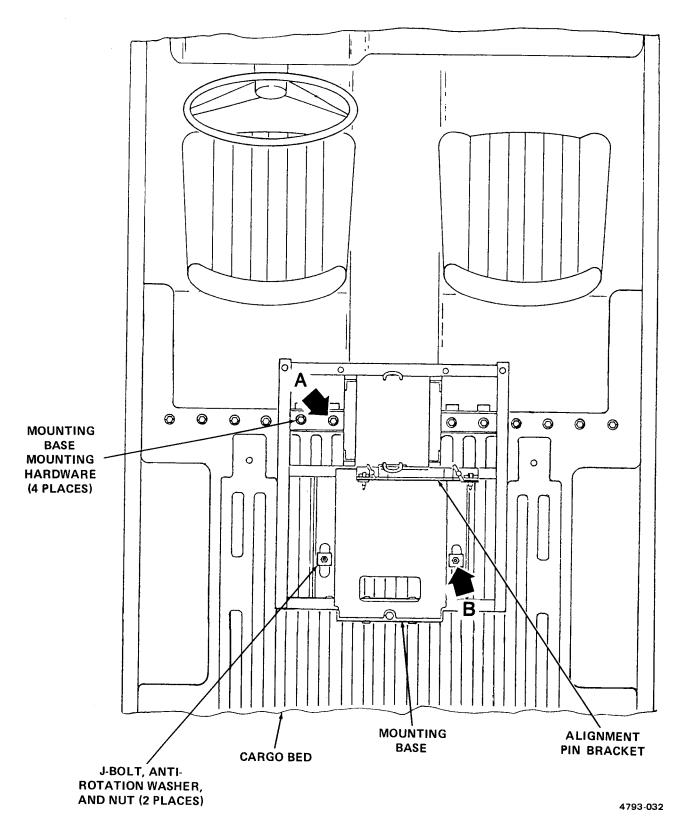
Mounting Base Installation (Sheet 1 of 2)
